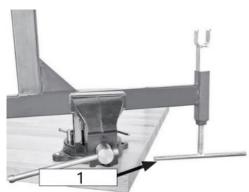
Enough clearance is required for the handle of the adjustment screw to turn completely
